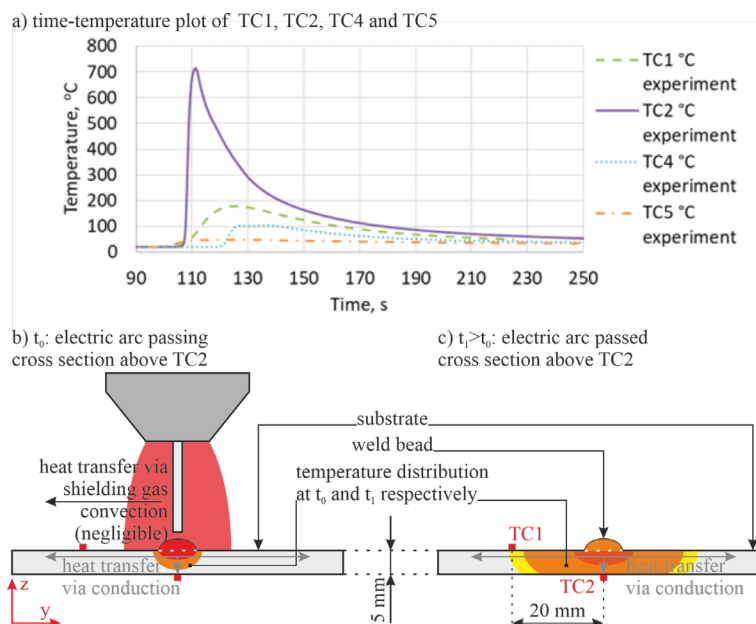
a) Temperature history recorded by four thermocouples during the welding process of a single weld seam, b) schematic sketch of welding process at  $t_0$  and c) schematic sketch of welding process at  $t_1 > t_0$ .
